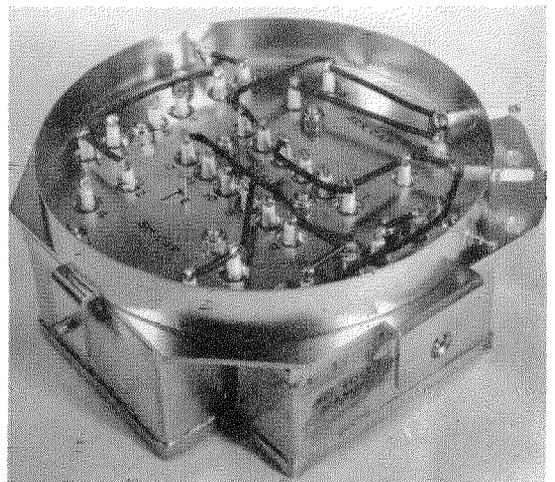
Assembled and wired adjustable equaliser section before the tray containing the terminals and wiring is filled with sealing compound.
